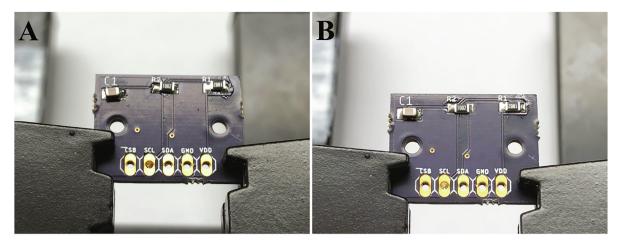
A) The PCB with the capacitor (C1, left) and resistors (middle, R1, and right, R2) placed on their respective pads before soldering. The middle and right resistors are interchangeable as they are the same value. B) The finished part after soldering the components on.
